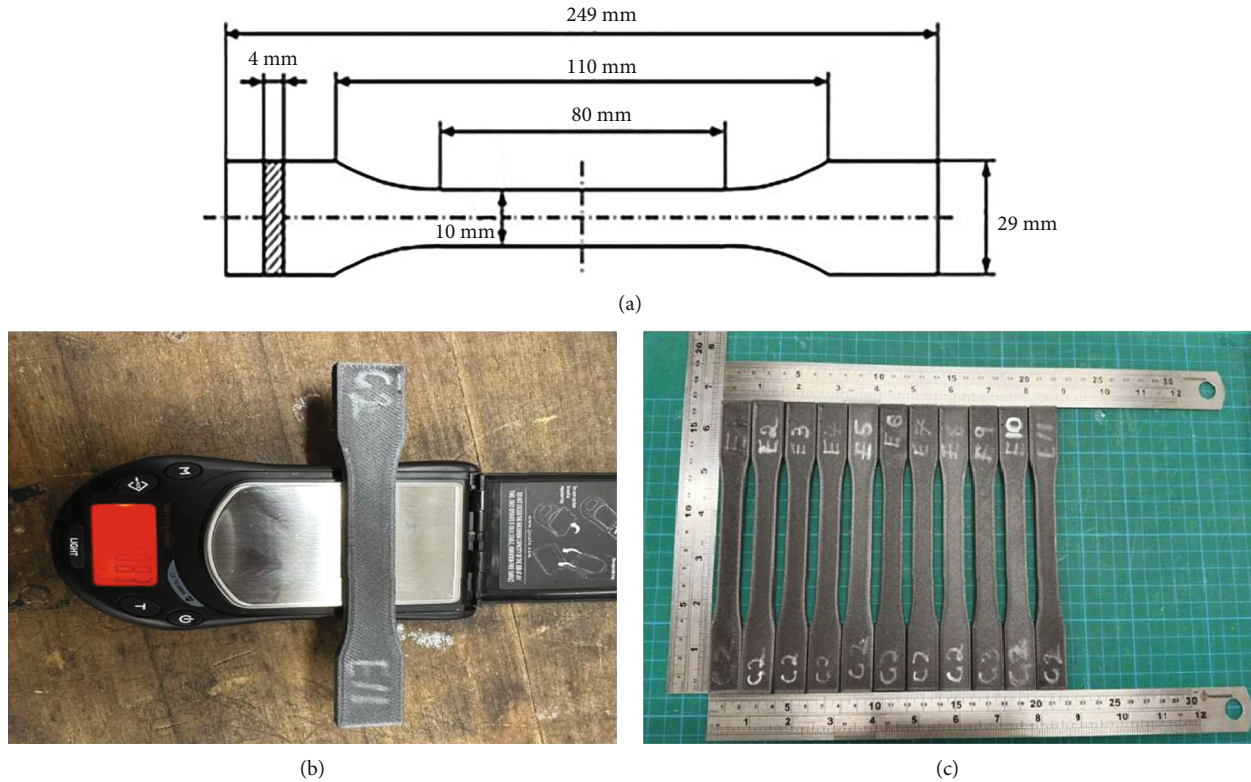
(a) 2D specimen with dimension. (b) Weighing of specimen. (c) Printed parts.
